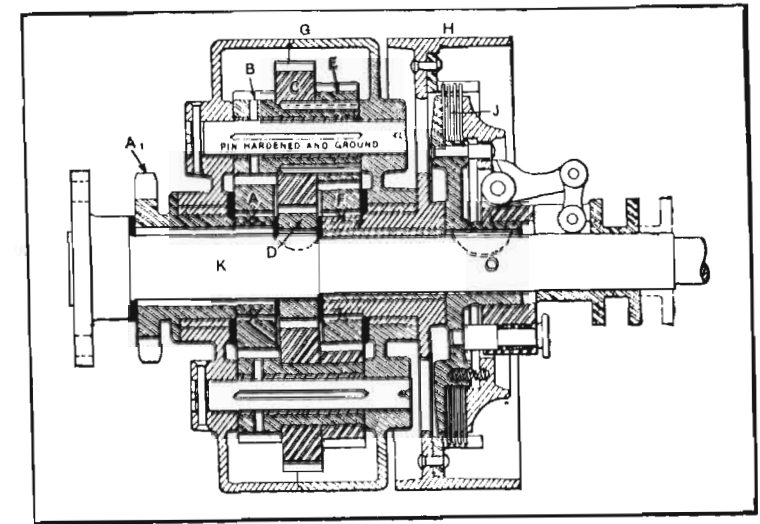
Another Arrangement of Epicyclic Gearing which Gives Forward and Reverse Motions
